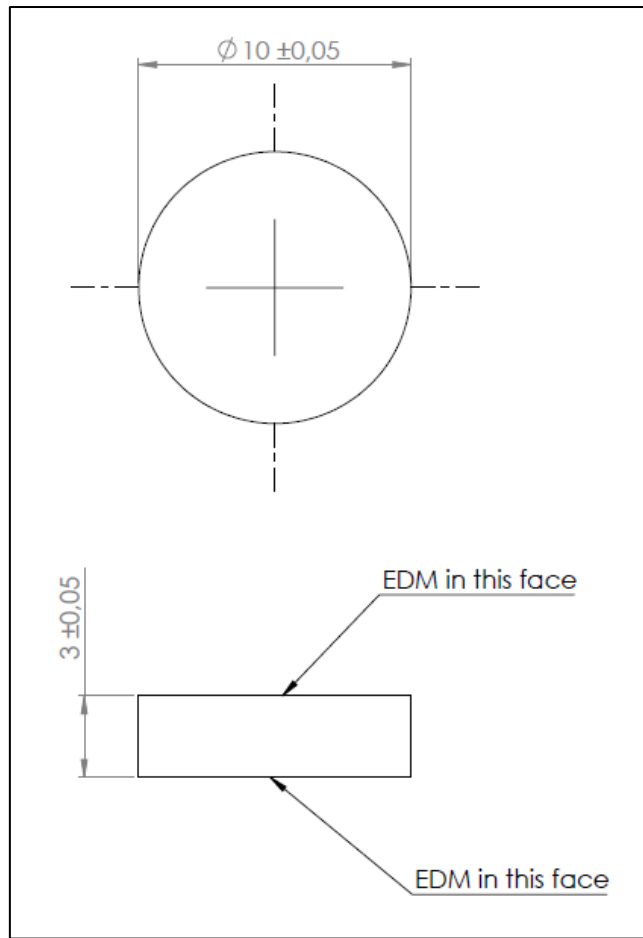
Technical drawing of the disc used for the laser flash analyses.
